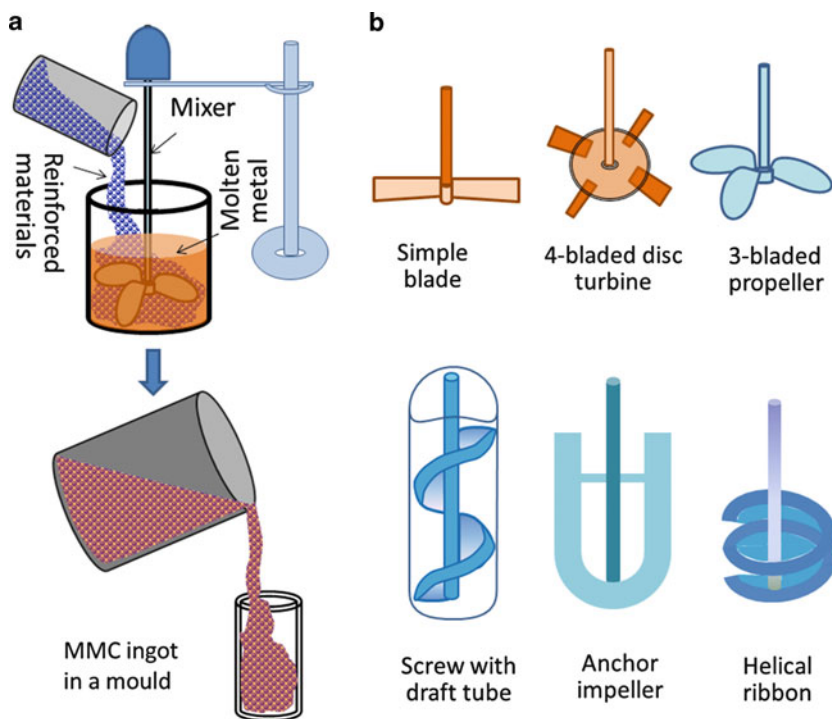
(a) Stir casting of MMC and (b) different types of mixer blades
